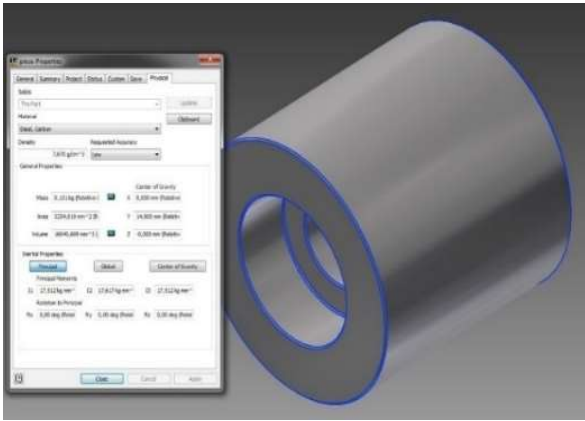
3D design of the workpiece using an application of the SolidWorks software
